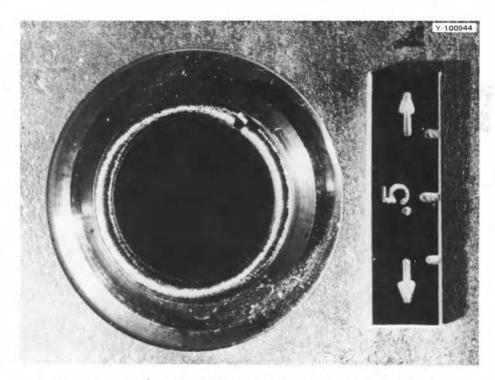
Close-up of a $\frac{3}{8}$ -in.-diam tube-to-header weld, showing the machined trepan.
